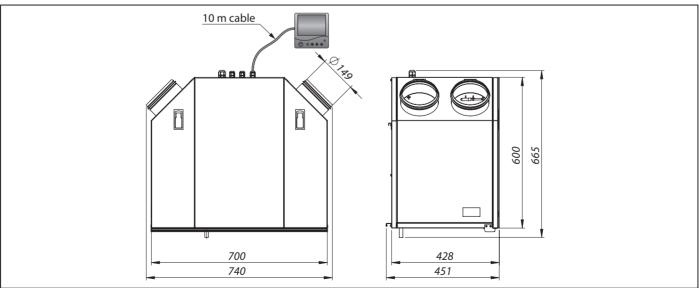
KOMFORT EC U(E)330-2 unit overall dimensions
